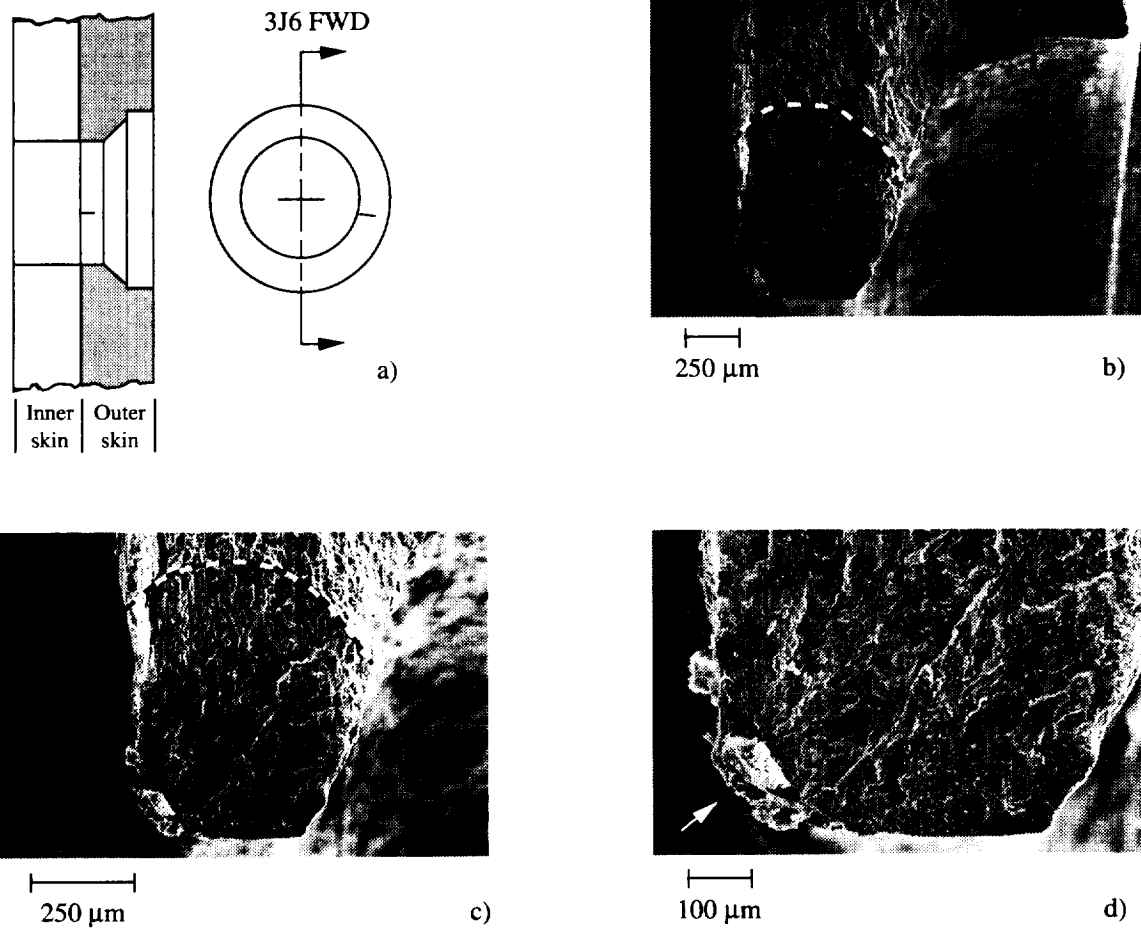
a) The schematic shows the rivet hole 3J6 configuration and the location of the outer skin fatigue crack oriented in the forward direction below the 3 o'clock position. b) The SEM micrograph shows the fatigue crack at the rivet hole. The dashed line marks the fatigue crack front. c) The SEM micrograph shows the fatigue crack fracture surface at the rivet hole shank region. The dashed line marks the fatigue crack front. d) The SEM micrograph shows the crack initiation site at the inboard corner of the rivet hole (arrow) at high magnification.
